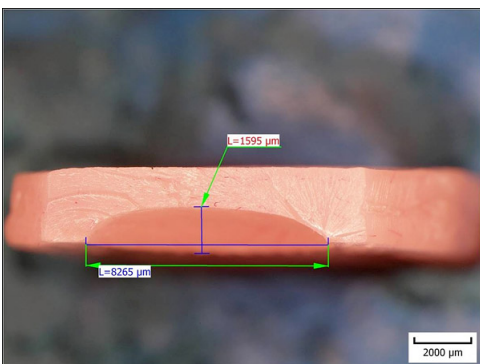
Transverse section, samples breaking: b. centrally and sideways
